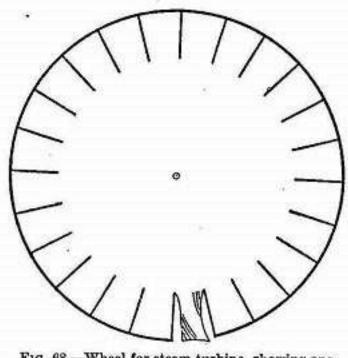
Wheel for steam turbine, showing one vane twisted into final position.
